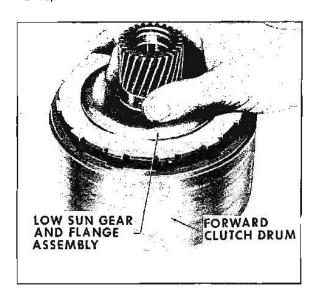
B-70 Removing Low Sun Gear and Flange Assy
